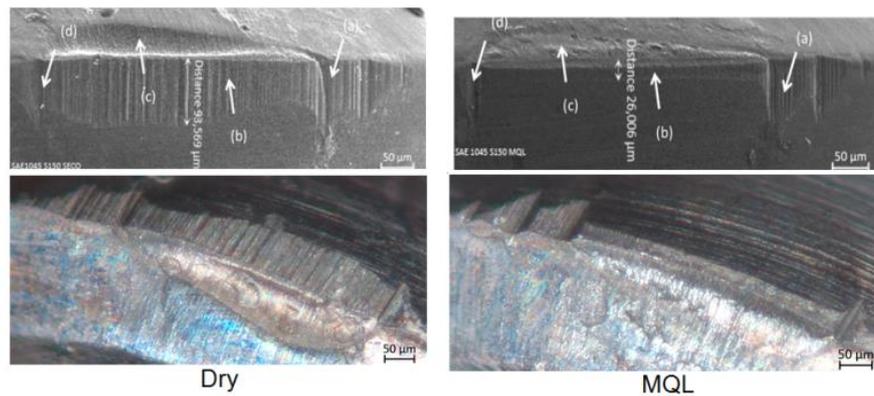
SAE 1045, flank and crater wear: (A) S=150m/min, dry, (B) S=150m/min, MQL. (a) secondary notch wear, (b) flank wear, (c) crater wear and (d) primary notch wear.
